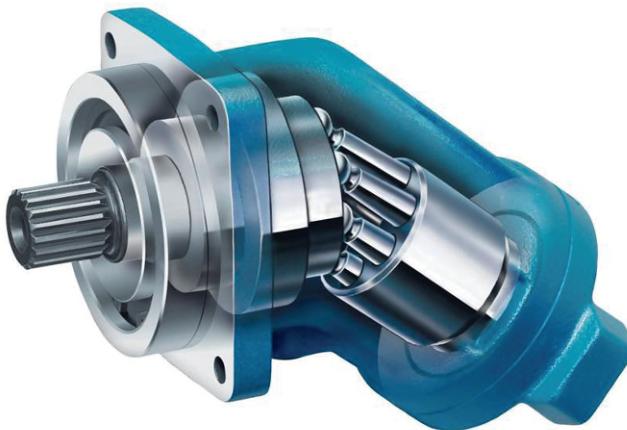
C Section view of a bent axis axial piston motor type A2FM (Courtesy of Bosch Rexroth)
